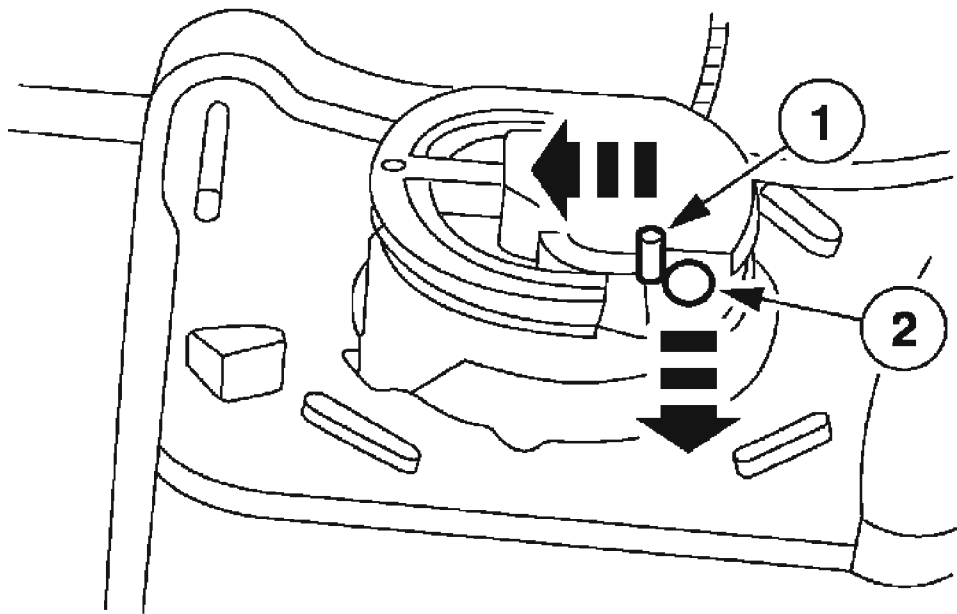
Pressing Locking Tab And Rotating Speed Control Cable Cover
